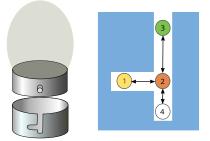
On the left illustration of a bayonet bulb with the corresponding casing is shown. Bayonet mechanism consist of radial pins, and a matching slot and spring to keep the two parts locked together. On the right, a projection of the slot in the casing to the plane is shown along with states than can be discovered by the controller. In disassembly task in order to release the lock, the robot first has to rotate the bulb across the horizontal part of the slot and then the pin slides into the vertical part of the slot. By lifting it upwards, the robot eventually learns to remove the bulb.
